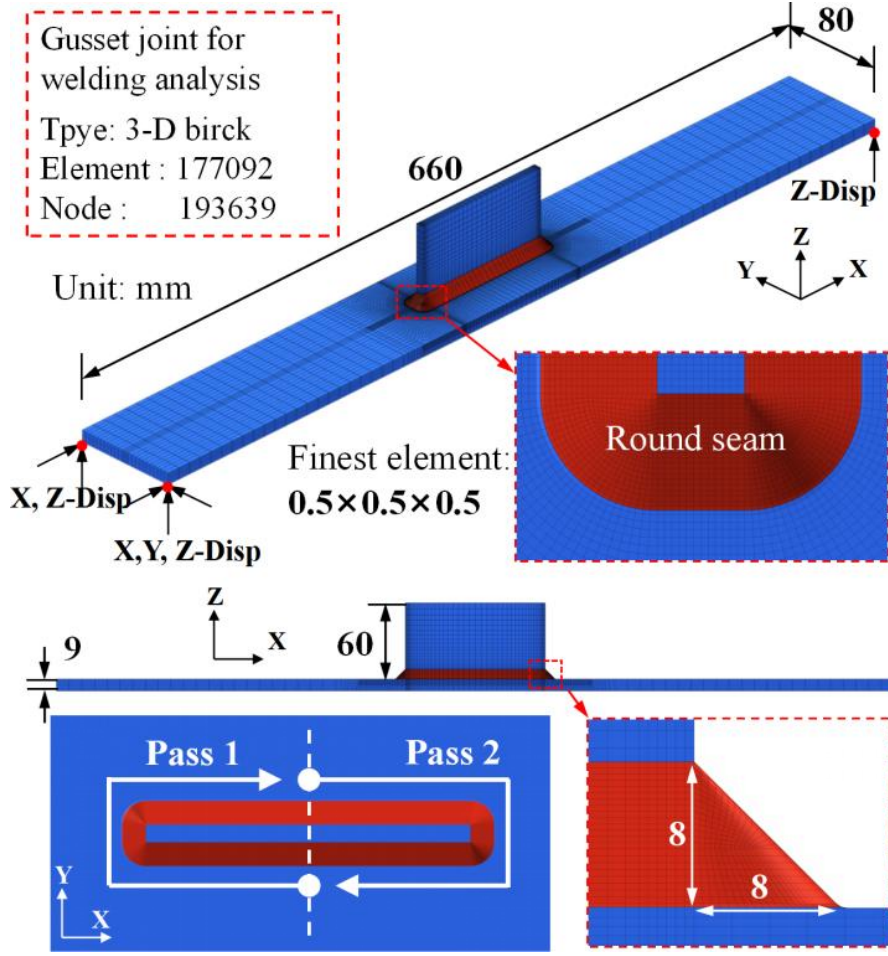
Coarse FE mesh of the gusset joint used in welding analysis.
